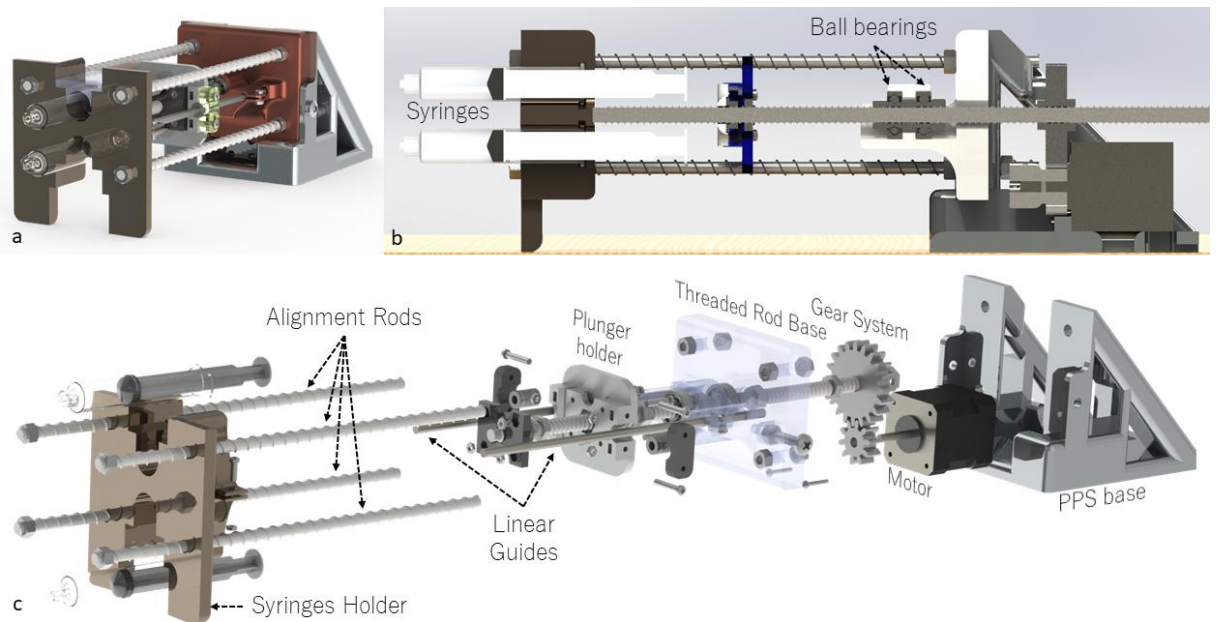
a) CAD design of the assembled PPS system. b) Cross Section view of the PPS system. c) Exploded view of the PPS system.
